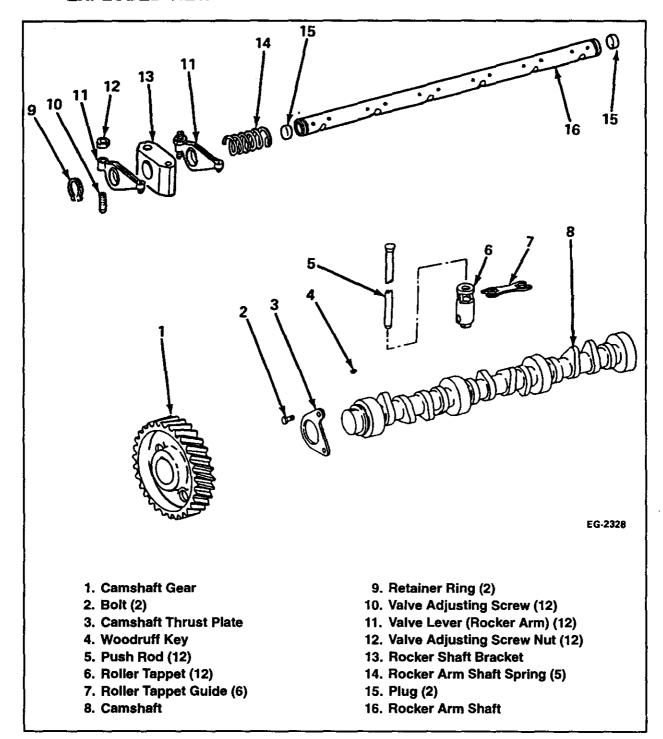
Rocker Arm Assembly, Camshaft, Tappets and Push Rods (Exploded View).
